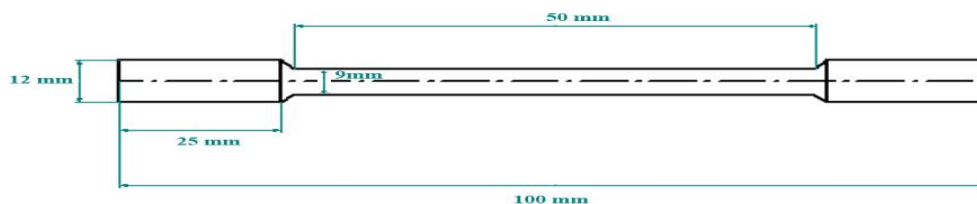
showing the Tensile test Specimen as per ASTM standard –E8
